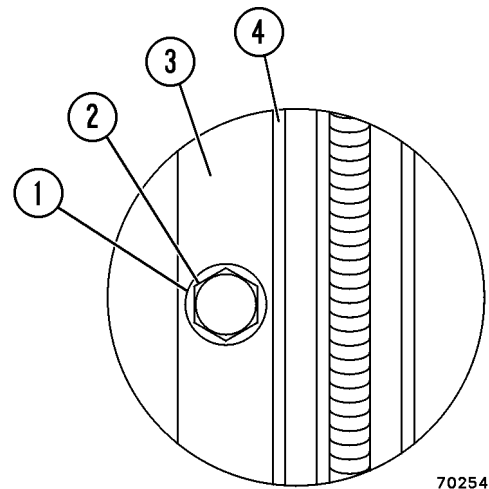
DOOR JAM BOLT ADJUSTMENT
